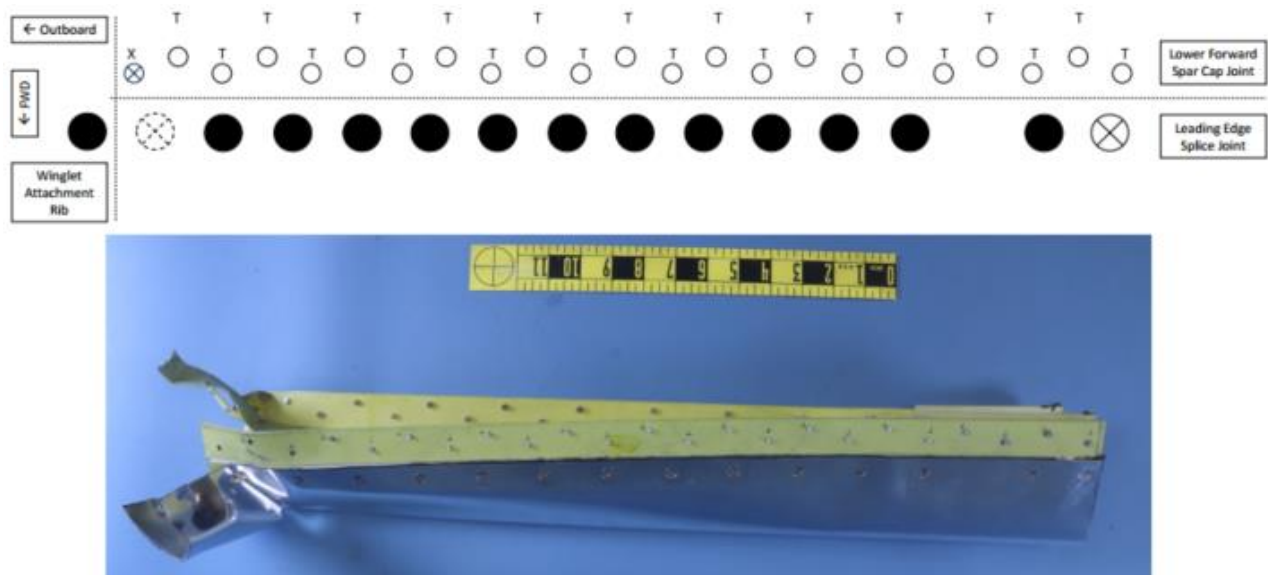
Schematic of the lower leading edge splice joint and lower skin-to-forward spar fastener conditions along the wing extension. Fractured fasteners are identified by an open circle, missing fasteners by a circle with an “X” and intact fasteners by a filled circle. Fracture designations are T = tensile fracture mode, S = shear fracture mode, B = mixed mode bending fracture used in conjunction with T or S as applicable. The fastener represented by a dashed “X” circle was drilled out to aid with disassembly.
